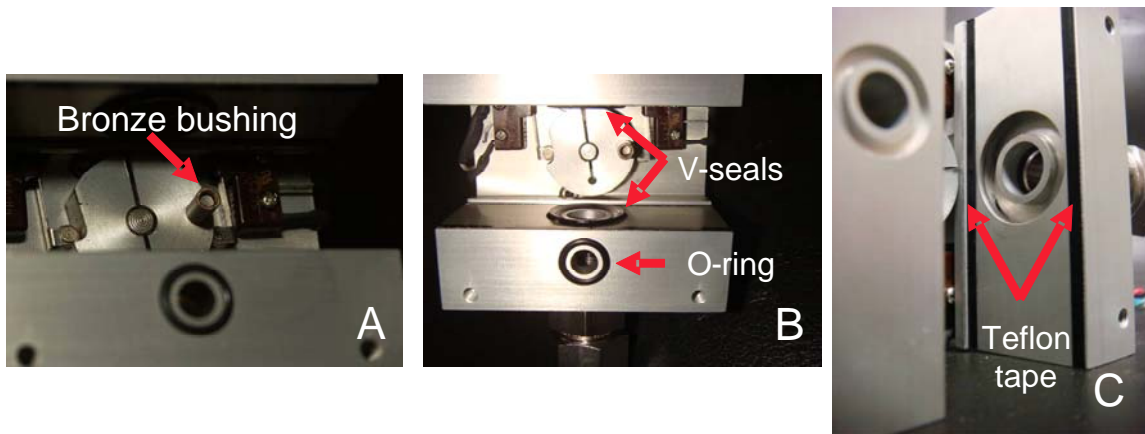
Photograph of the switching valve with the valve diverter block removed. The brass bushing on the motor cam pin is visible (Panel A), the V-seals and bottom plate O-ring are accessible (Panel B), and the Teflon tape (Panel C) can be inspected.
